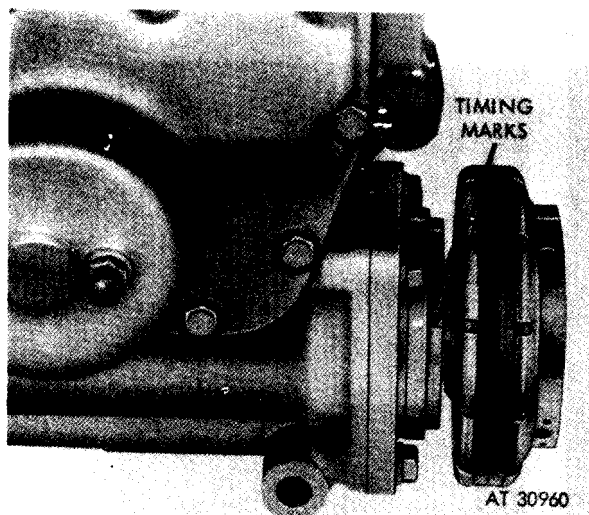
Timing marks on fuel injection pump bearing retaining plate and diaphragm coupler hub aligned.
